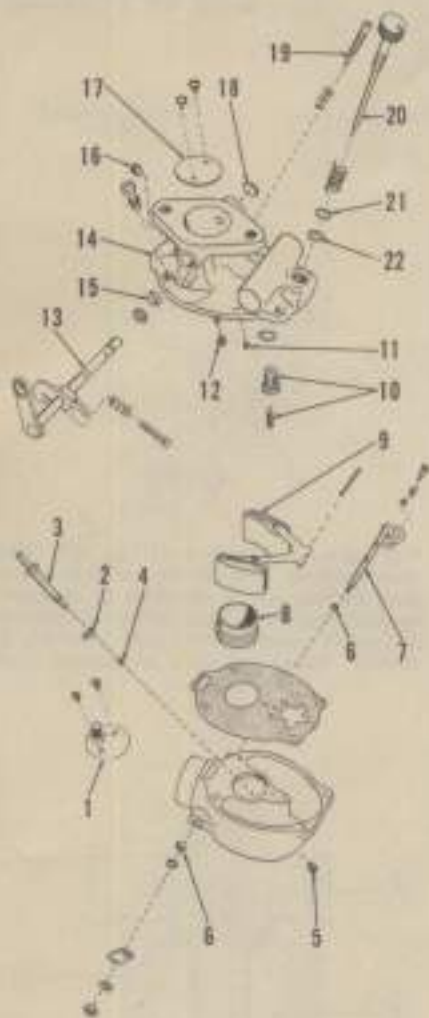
Exploded view of Marvel-Schebler carburetor typical of TSX-670, TSX-701, TSX-815 and TSX-844 models.
